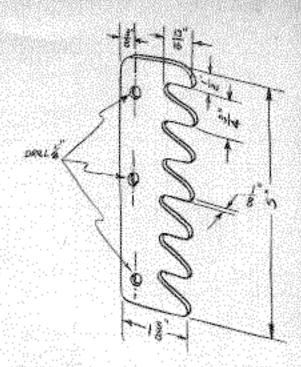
Lock plate. Use 3 - #10 x 1" round head wood screws to fasten leg lock plate to front leg. Locate bottom of plate 5" from bottom of leg.
